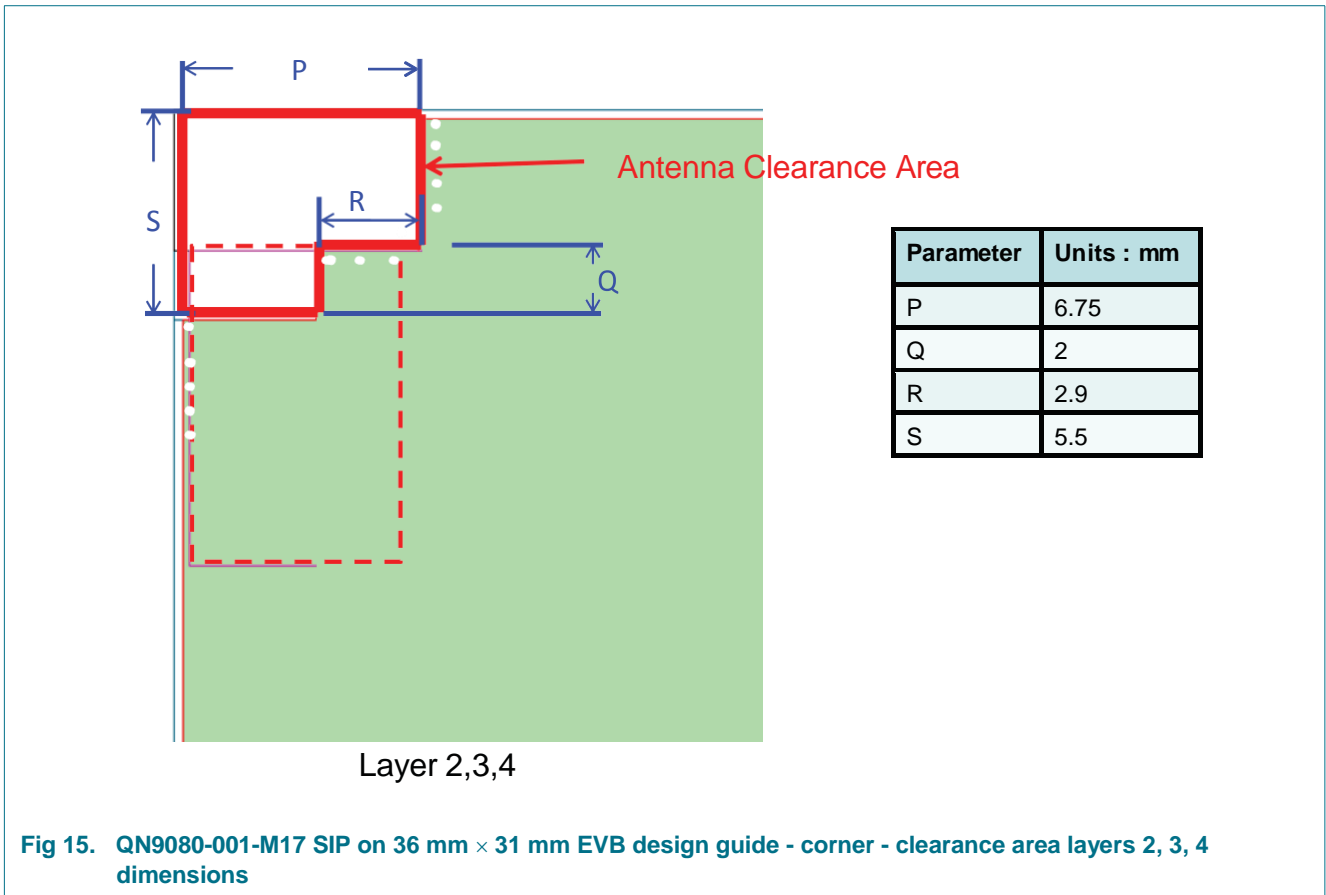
QN9080-001-M17 SIP on 36 mm × 31 mm EVB design guide - corner - clearance area layers 2, 3, 4 dimensions
